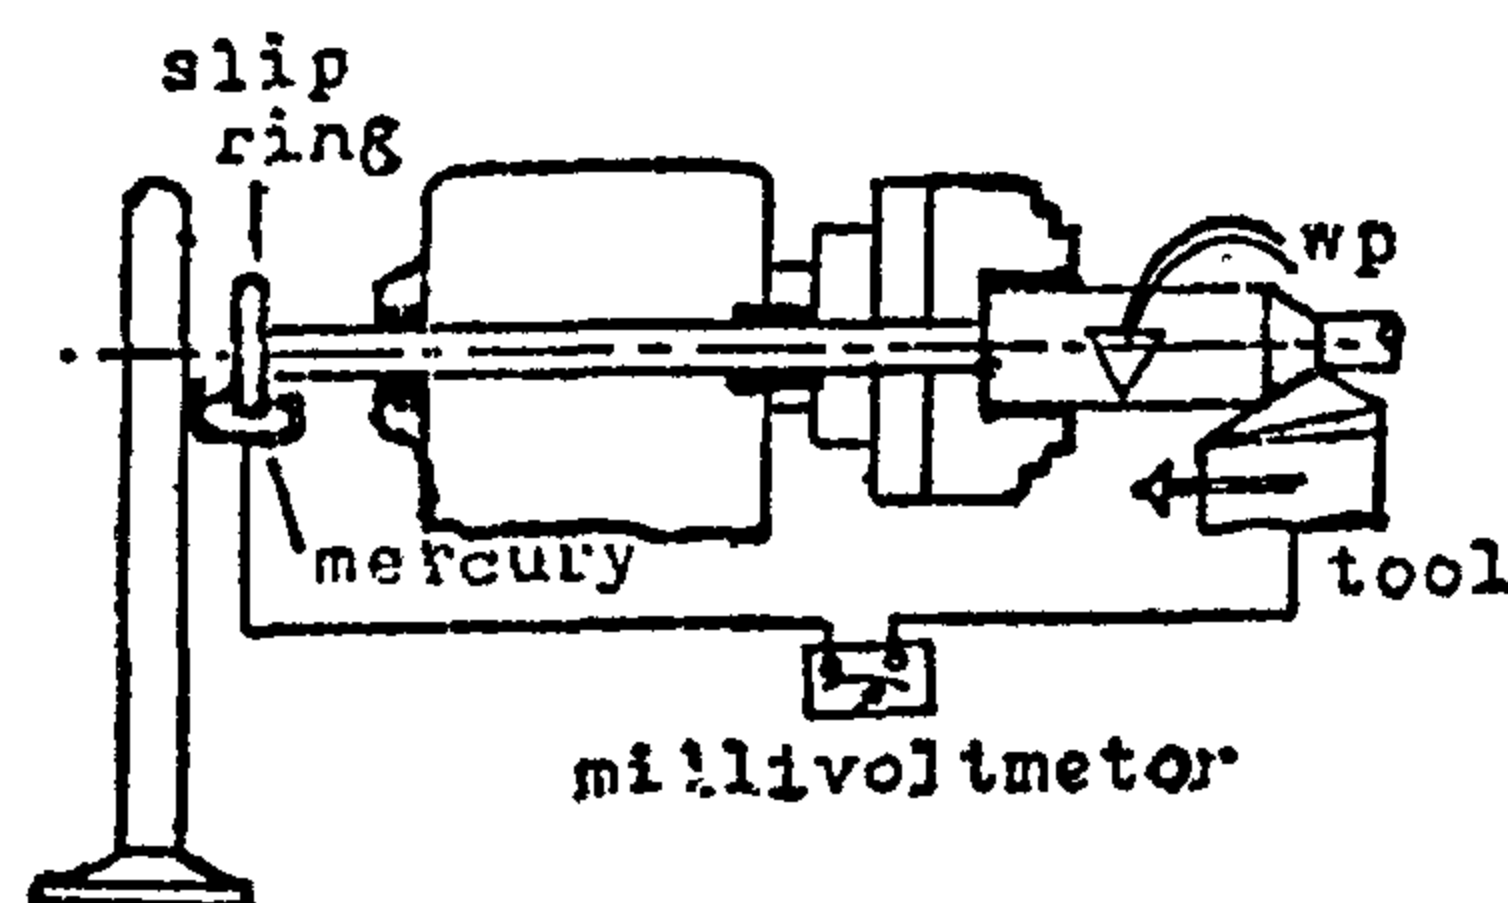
Arrangement for Calibration of Tool-Work thermocouple.
